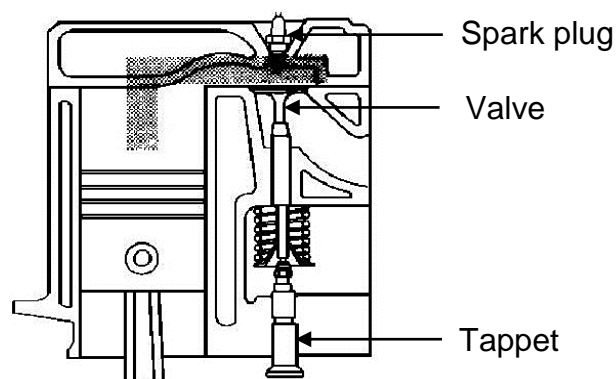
Side valve engine also known as flat-head and L-head engine (adapted from Shaikh, 2015)
